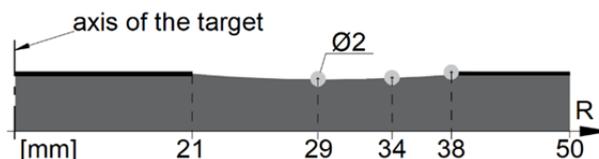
The cross-section of the Zn/Al target showing dimensions, drawing not in scale.
